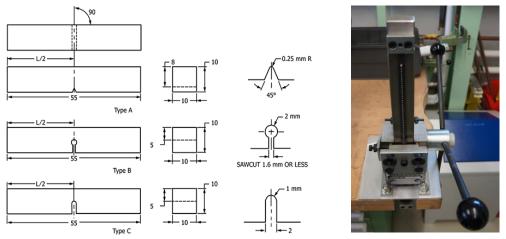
Charpy Impact Test specimens of types A, B and C (on the left) and CNB-35 machine (types A and B - on the right)
